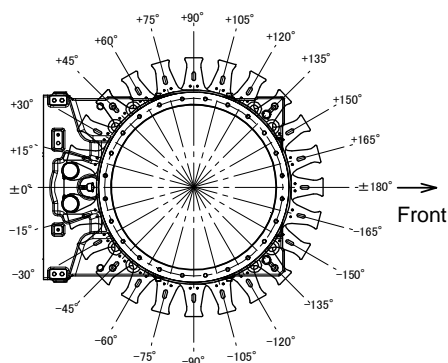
(b) Mounting the J1-axis adjustable mechanical stopper (1/2)
